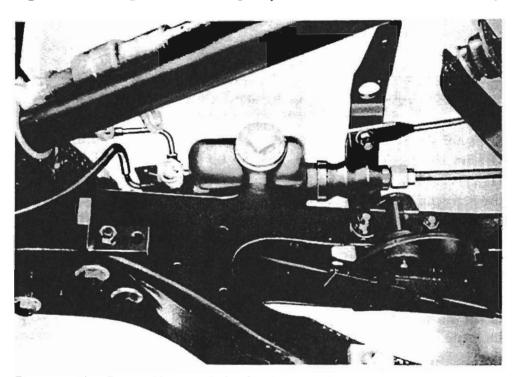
The Brake Master Cylinder Is Bolted to a Secondary Member of the Frame, Just Forward of the Brake Pedal.
